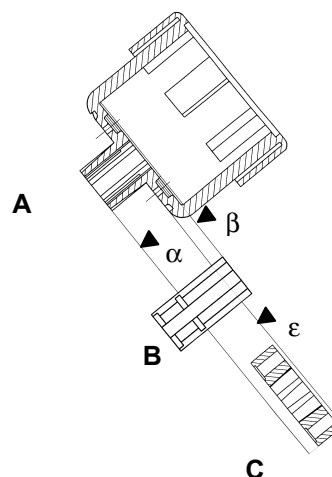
C – Correct alignment of drive magnet assembly, sockets and collar
